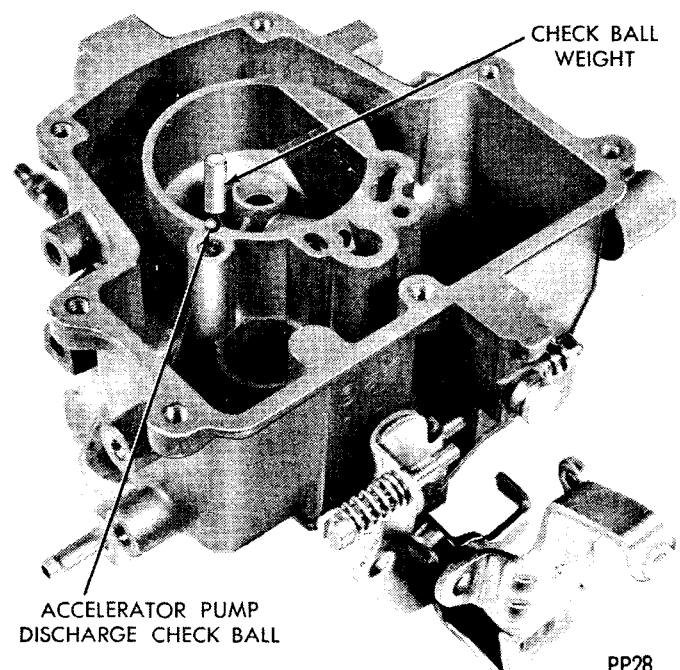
Accelerator Pump Discharge Check Ball and Weight Location
